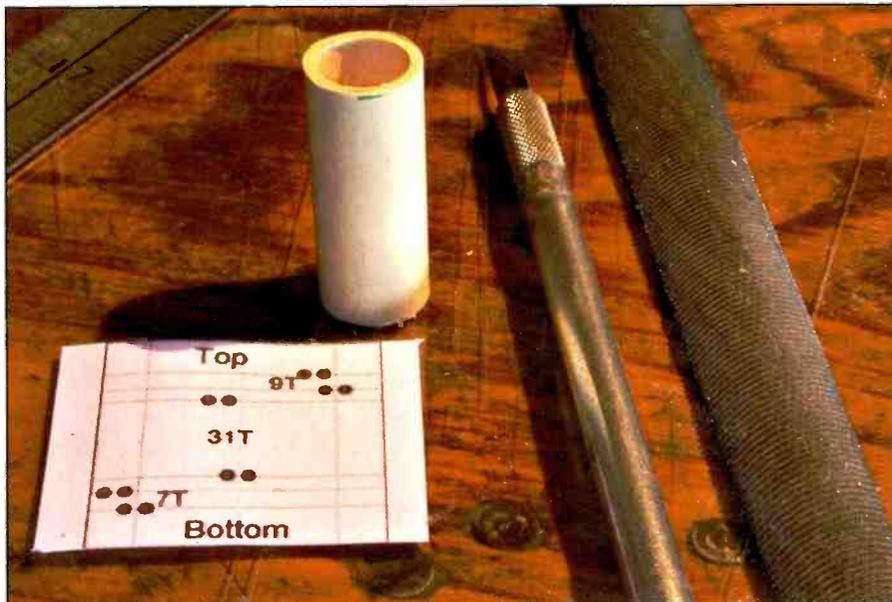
Photo E. Preparation for making the Scout Regen's multiwinding coil includes smoothing the PVC form and affixing a drilling template on the tube's circumference.
